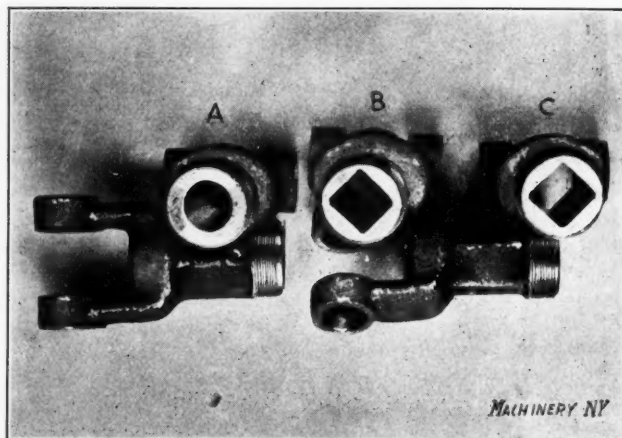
Universal Joint Forks, showing Drilled, Machined, and Broached Holes
